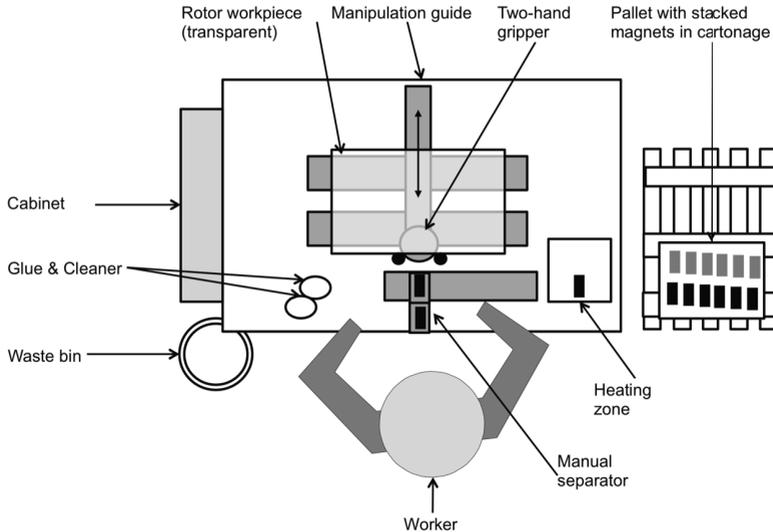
MTM-UAS Analysis: Outer rotor fixture with ELMAG gripper system.
